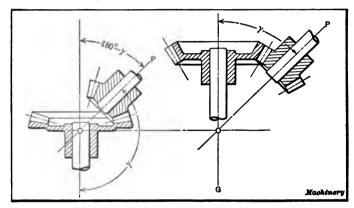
Internal Bevel Gearing, a Type to be Avoided
